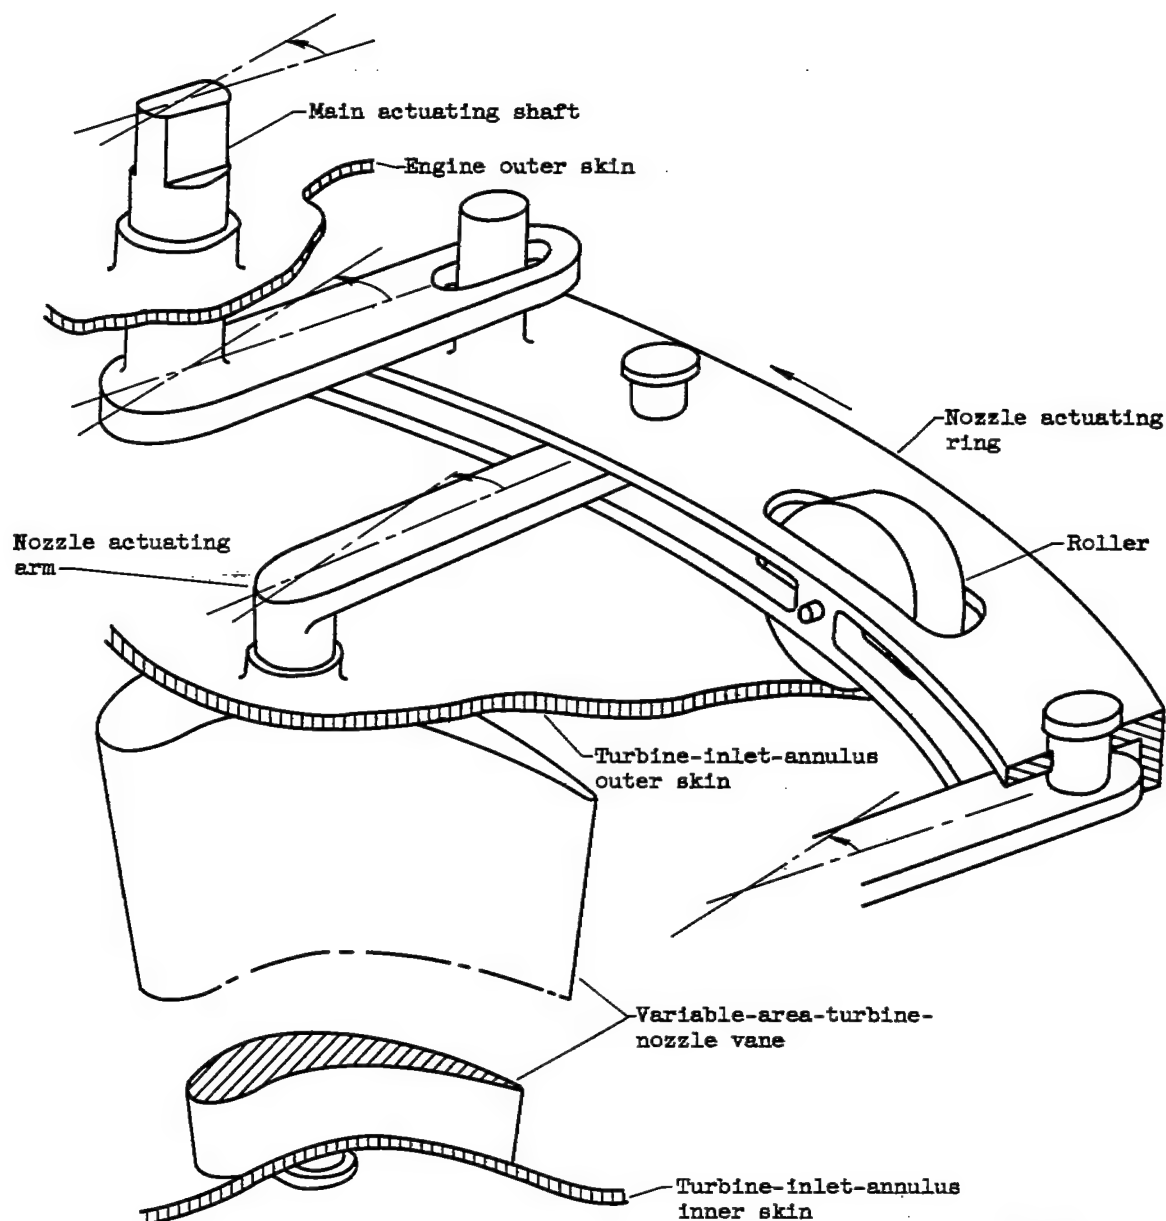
Schematic sketch of variable-area-turbine-nozzle actuating mechanism.
